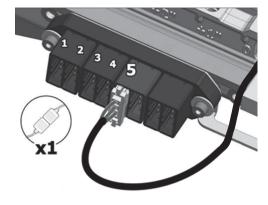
The tilt motor cable is connected to the fifth position of the connector block.
